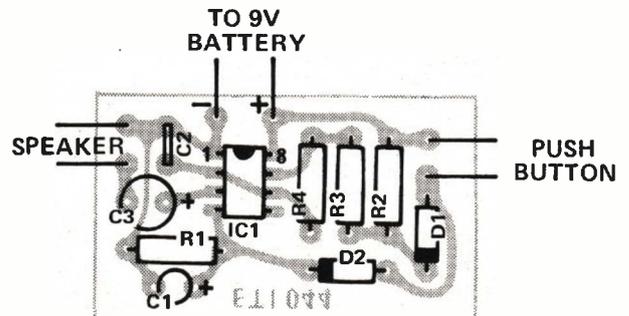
This overlay shows how to fit components to the printed-circuit board.
